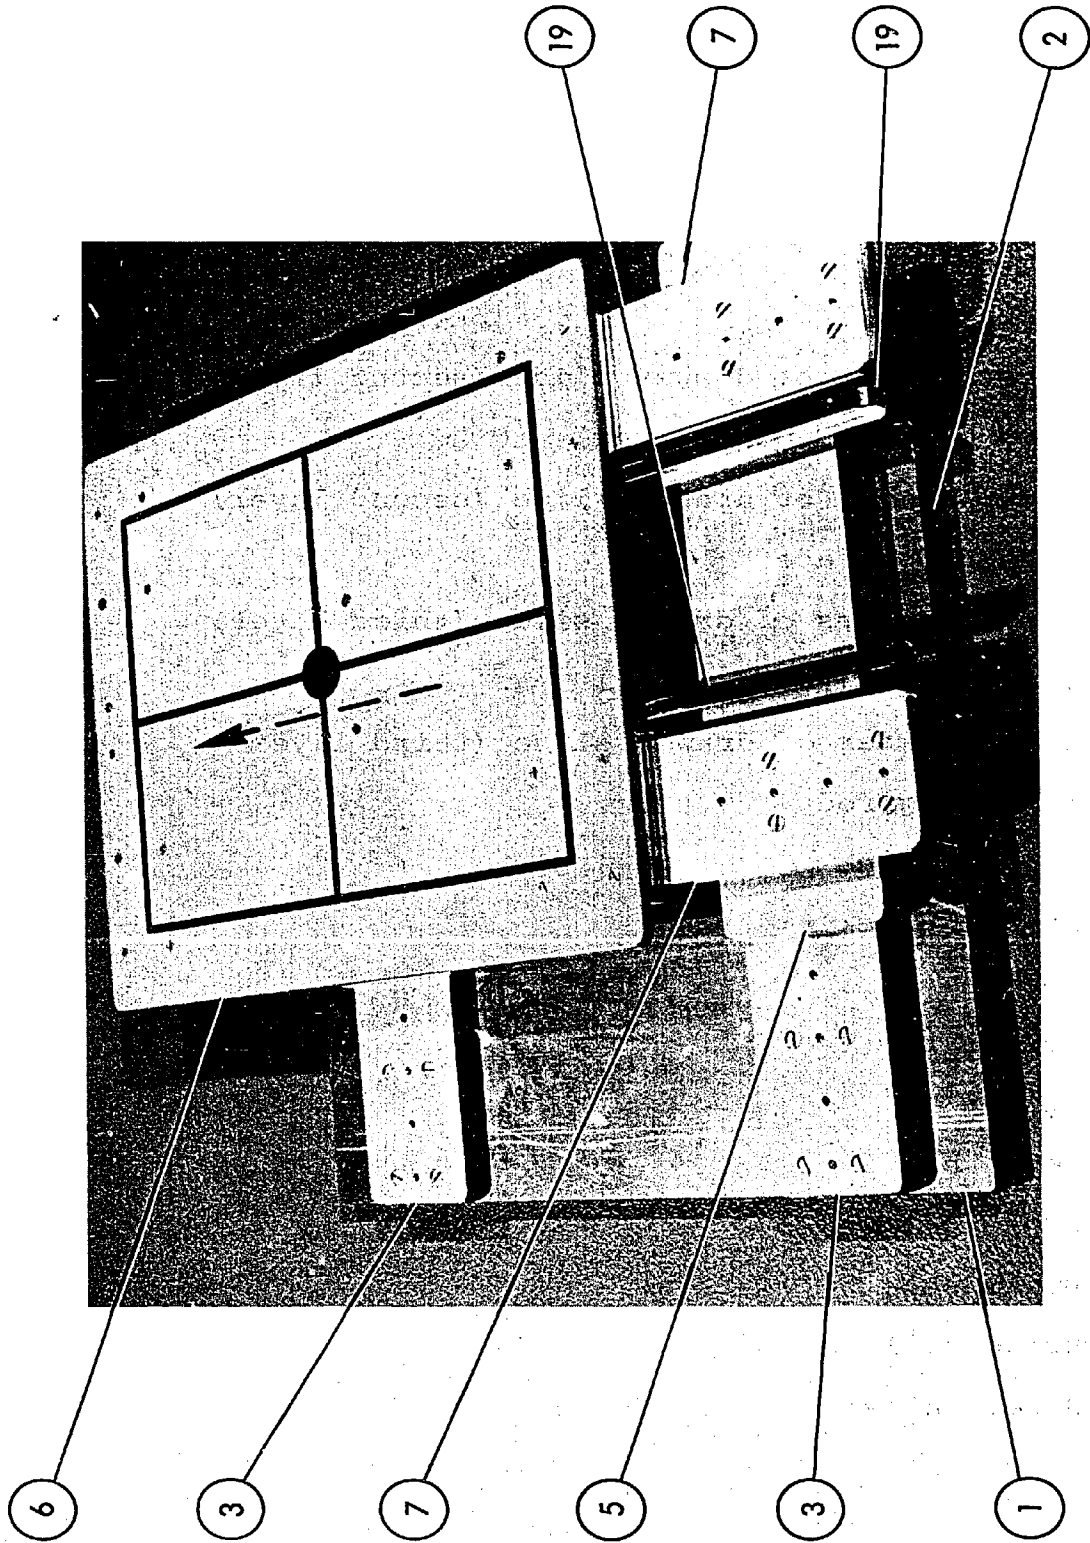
Top view of X-Y Platform showing its working surface displaced to the right and to the rear
